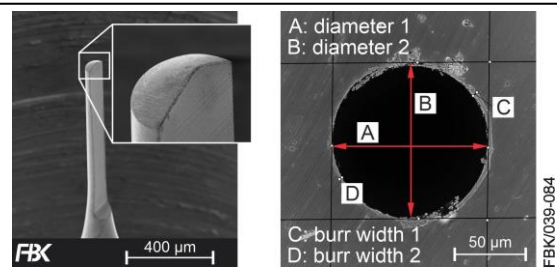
Micro drill with a diameter of 100  $\mu\text{m}$  used for the experiments and exemplary evaluation of a drilled hole.
